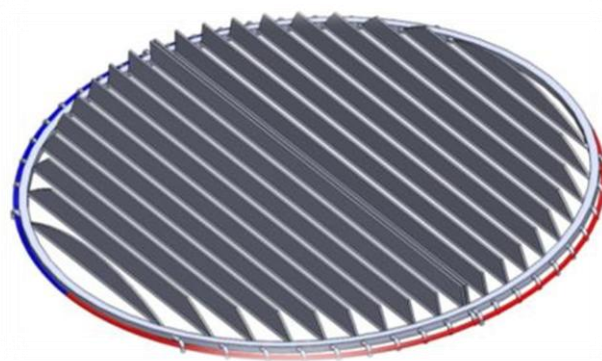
DETAIL DESIGN OF ROTORS CAVITY CLOSING MECHANISM
